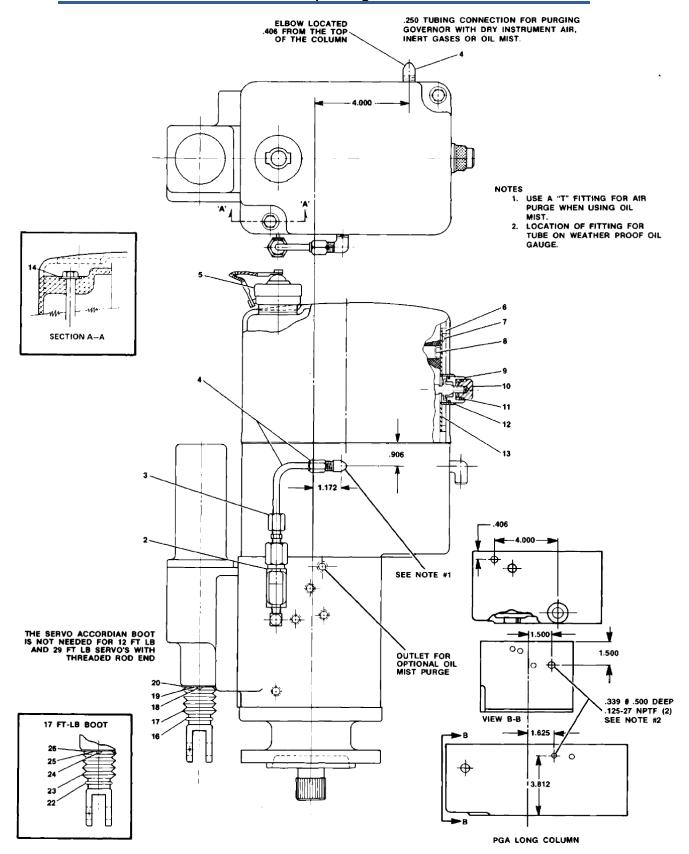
Outline Drawing for PG-PL Governor Showing Location of Weatherproof Fittings
